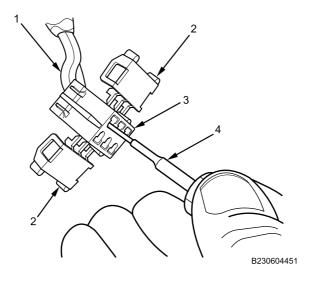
Rear Door/Ramp Control Harness to IP Harness Connector Removal.
